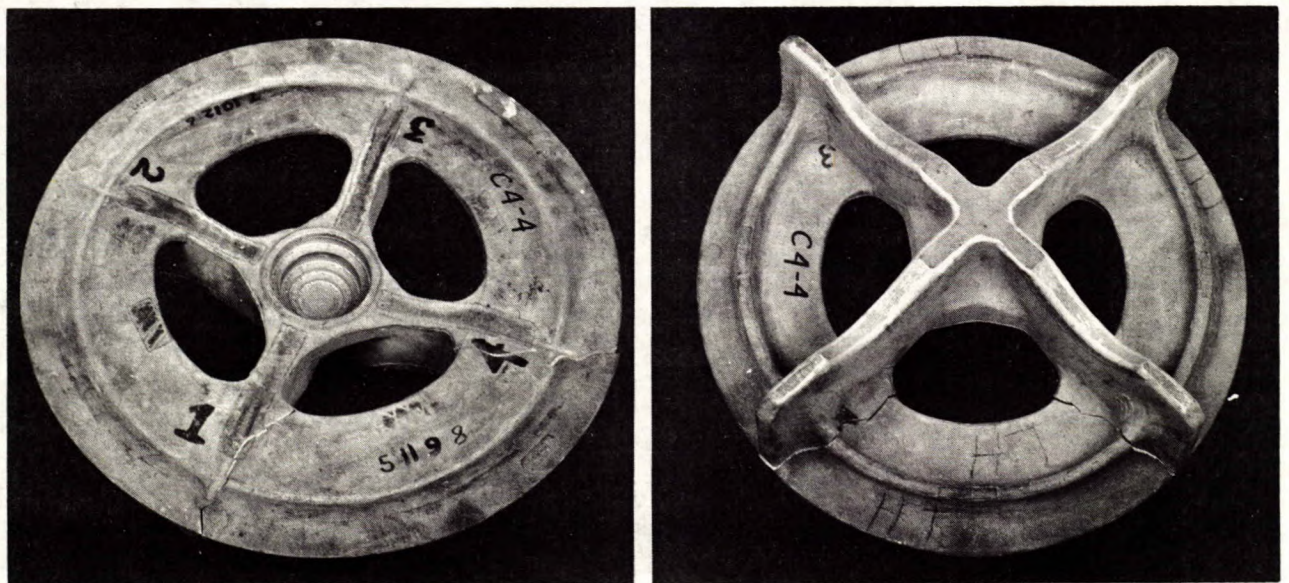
Fracture of casting due to unsoundness in reinforcing rib (tested in sand).
